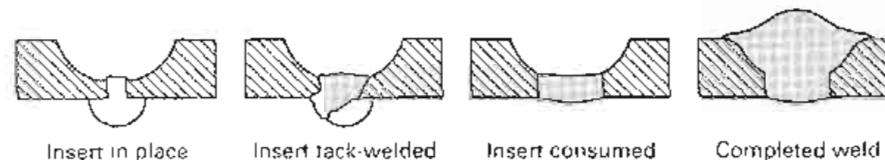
The use of a consumable backup insert in making a fusion weld.
